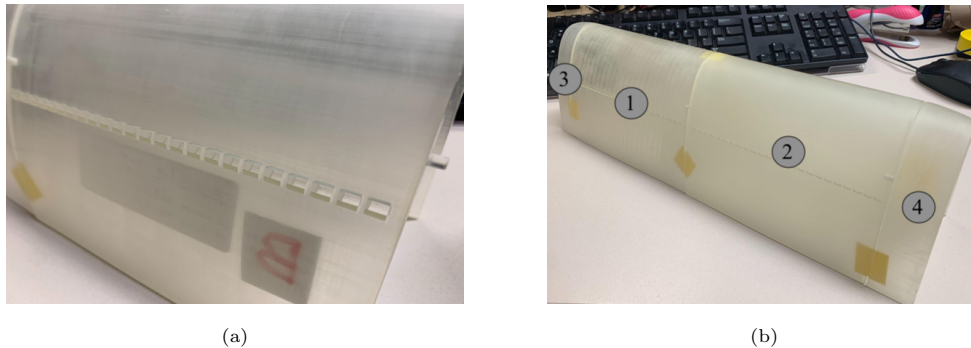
A 3D printed passive deterrent on a sleeve. The deterrent is printed in four parts due to the size limitation of the 3D printer. (a) a zoomed view of the resonating cavities (resonators), and (b) the assembled sleeve with the resonators engraved in it.
